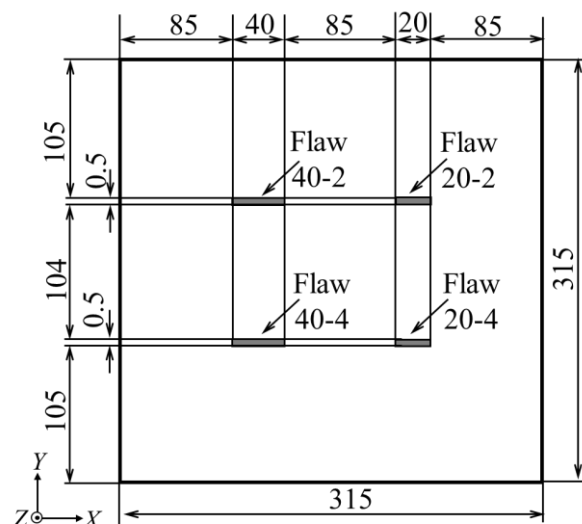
Aluminium test piece dimension for experiment (unit in mm).
